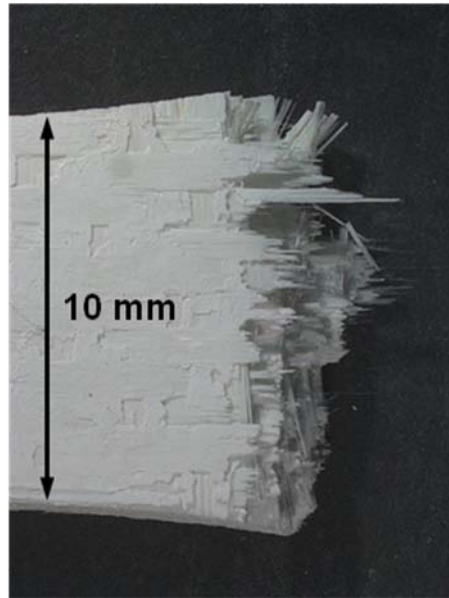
Fracture surface of the N720/AM specimen tested in tension to failure at 900°C in laboratory air.
